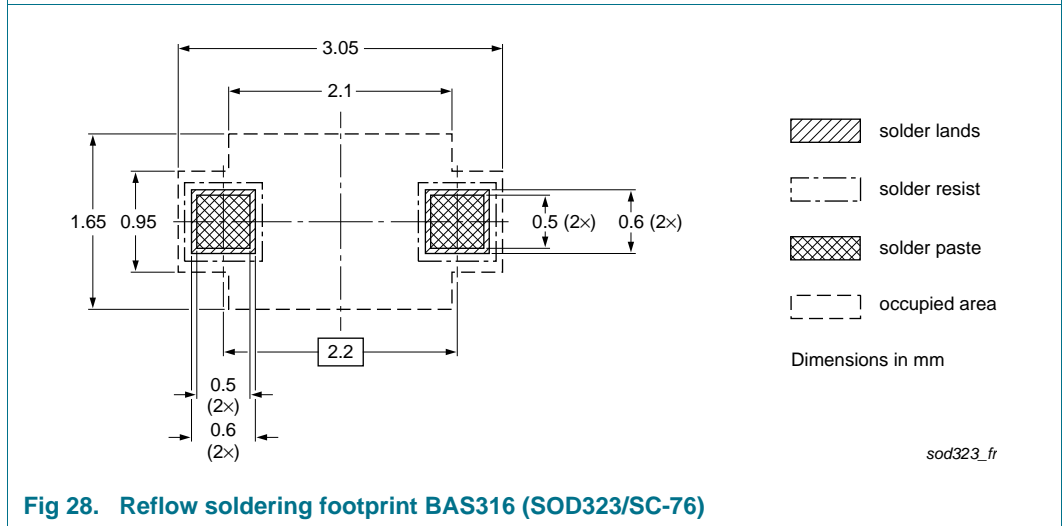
Reflow soldering footprint BAS316 (SOD323/SC-76)
